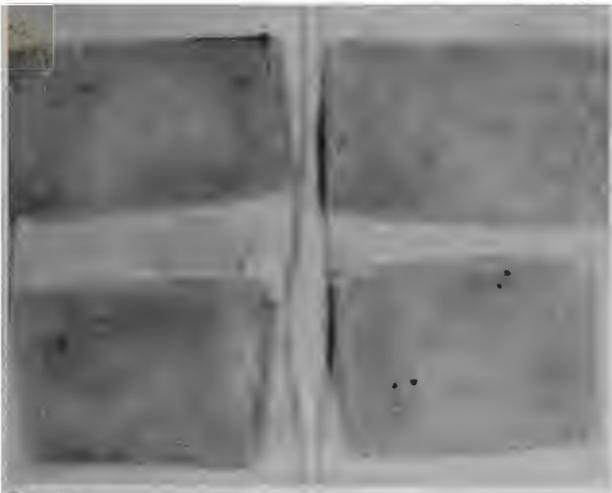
Results of porosity test on IVD aluminum coating External surfaces at top--internal surfaces at bottom
